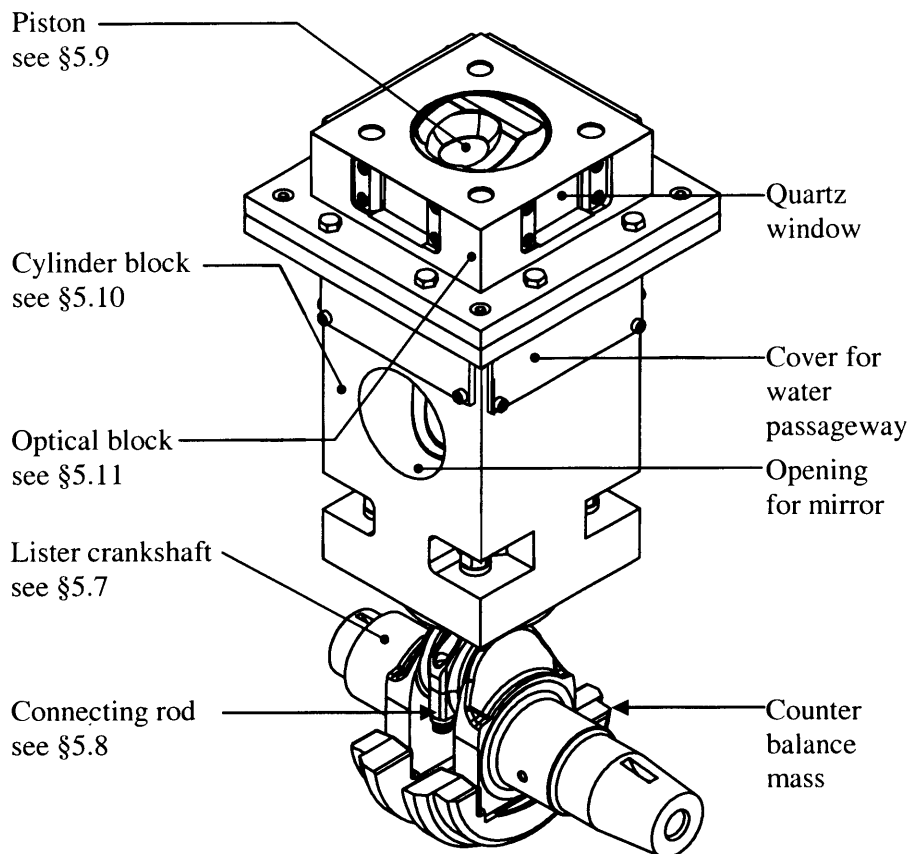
Principal parts of UCL/Jaguar optical engine
